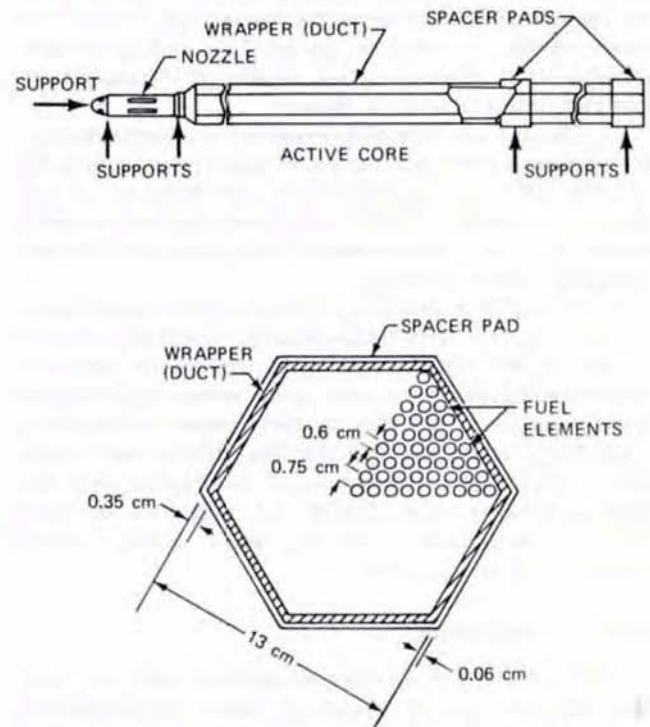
Typical fuel assembly of an LMFBR. (After Refs. 16 to 18.)
